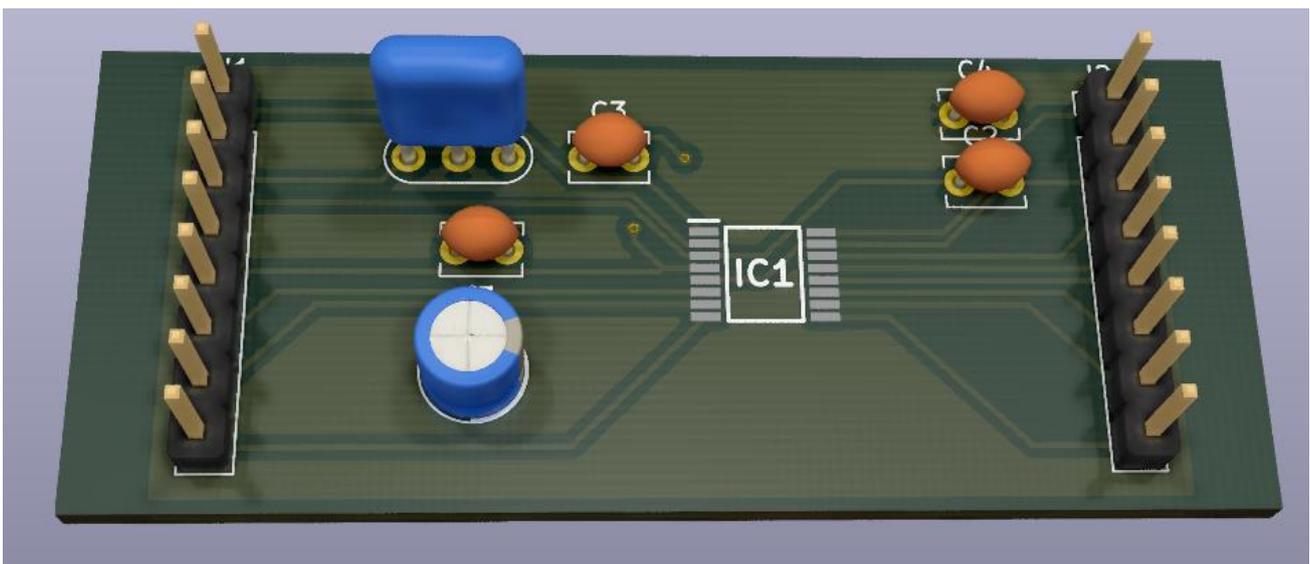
Waveform Generator with Oscillator PCB Test Setup
